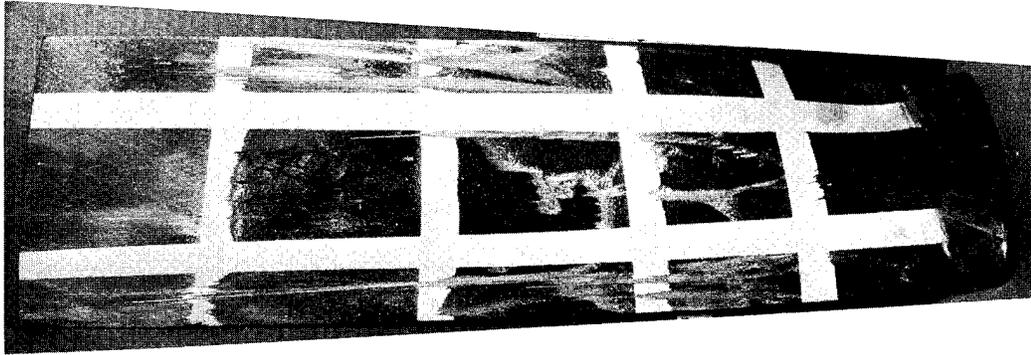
Dye Penetrant Inspection of Dovetail After Impact, Blade S/N NG1.
